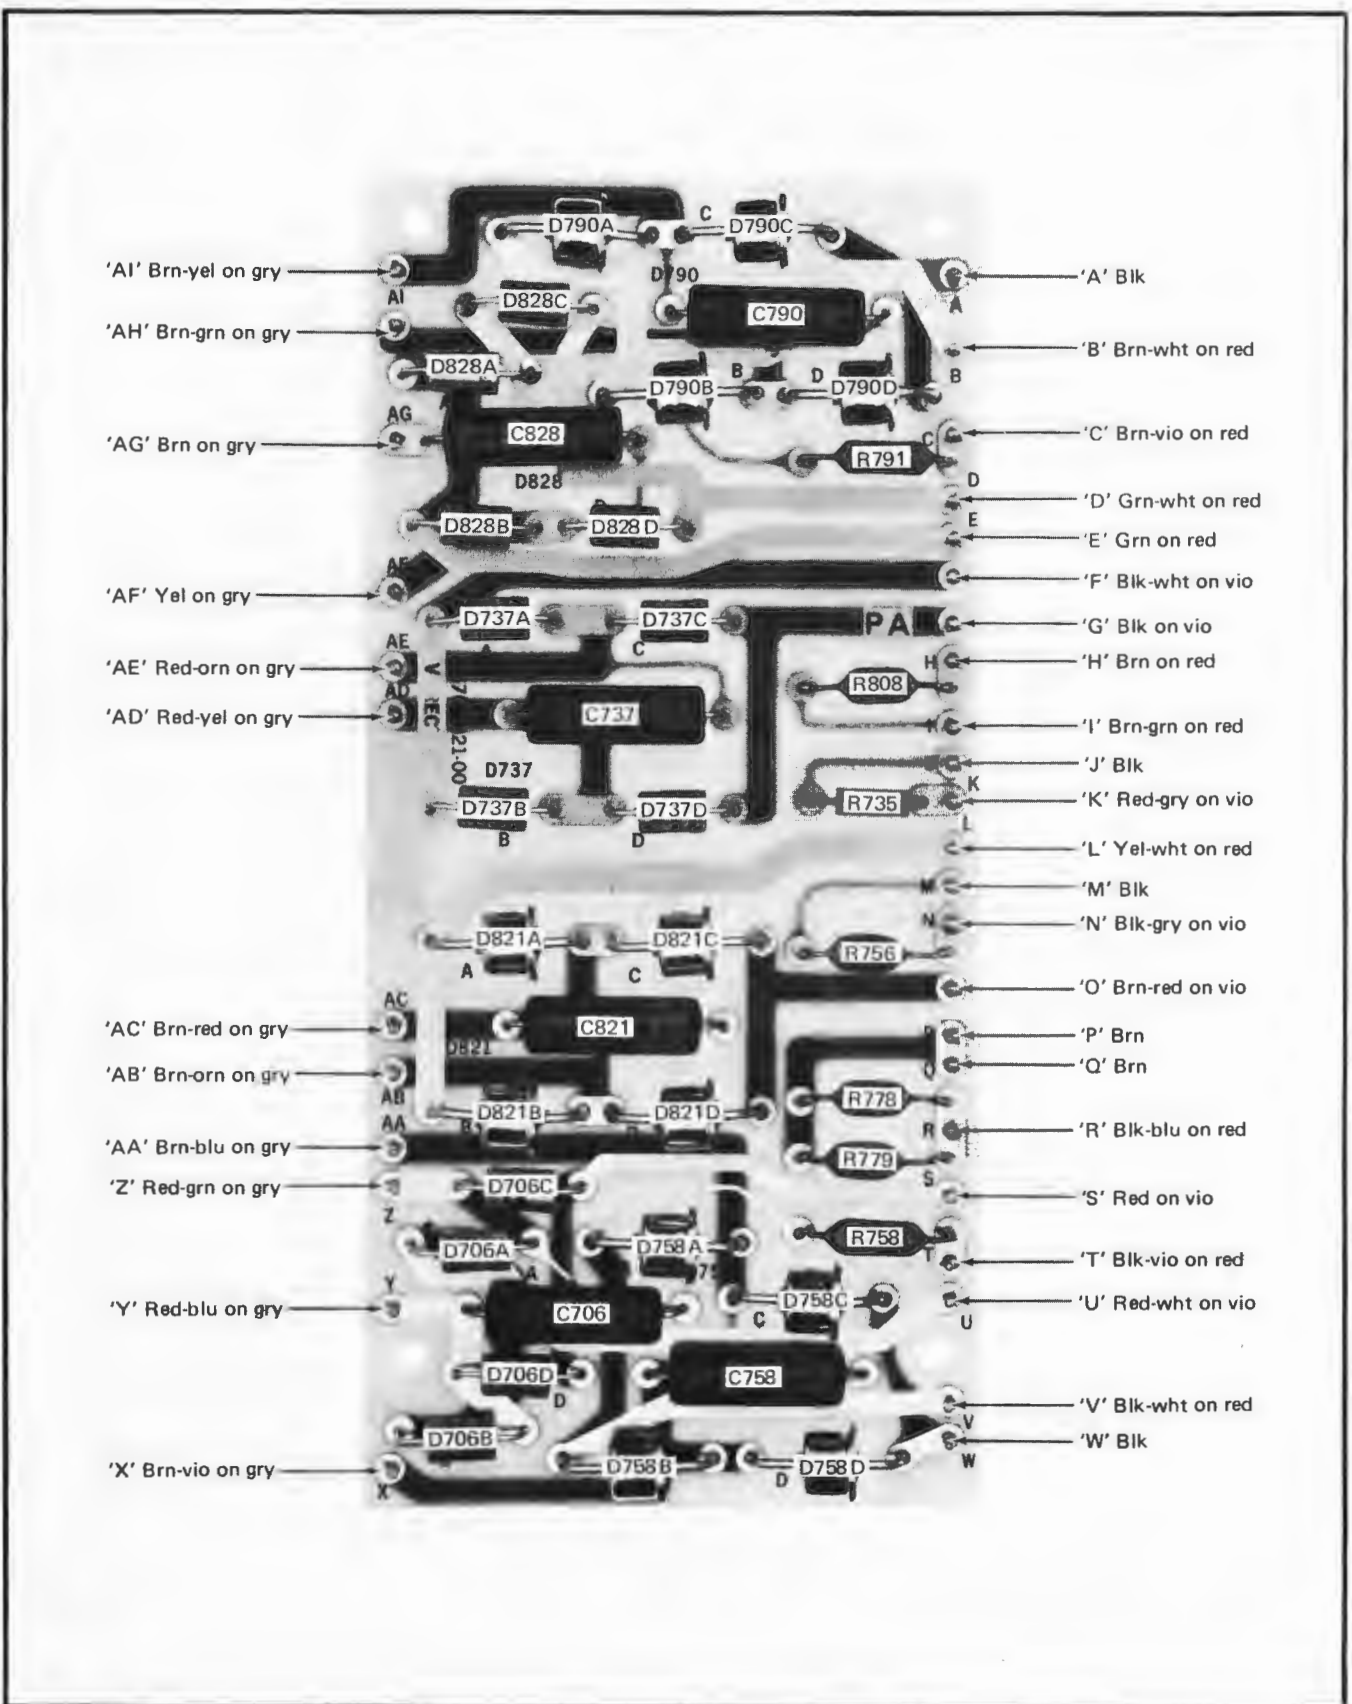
Component locations and wiring color codes on L.V. Rectifiers circuit board.
